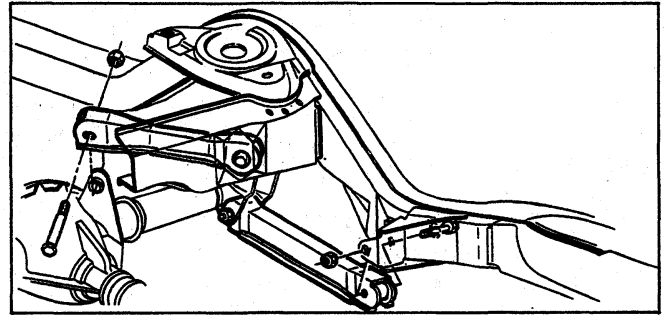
Upper and Lower Control Arm Assembly (Chevelle)
